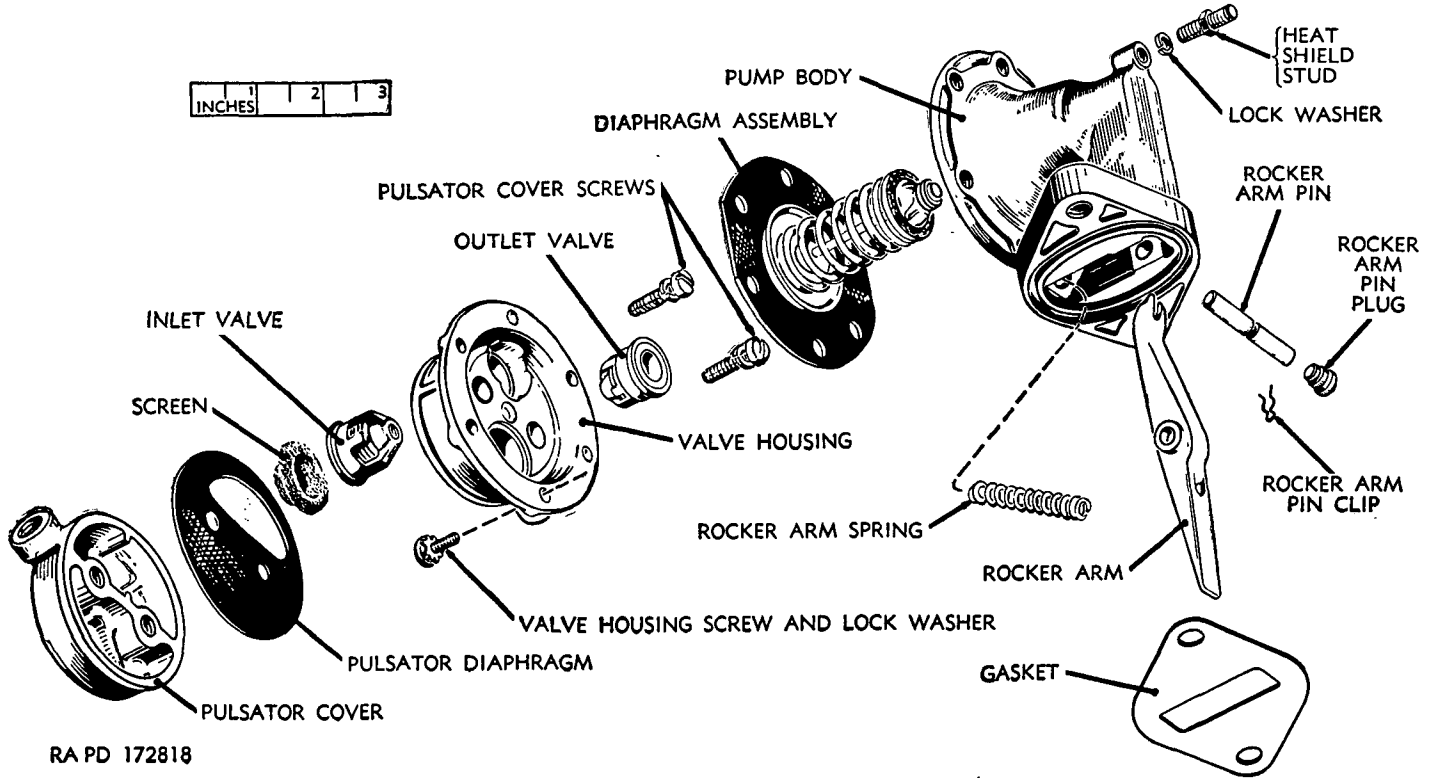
Fuel pump with screen filter (model M639S)—exploded view.
